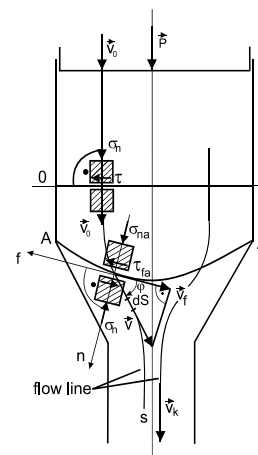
Transverse welding in forward hot extrusion[8,9]
